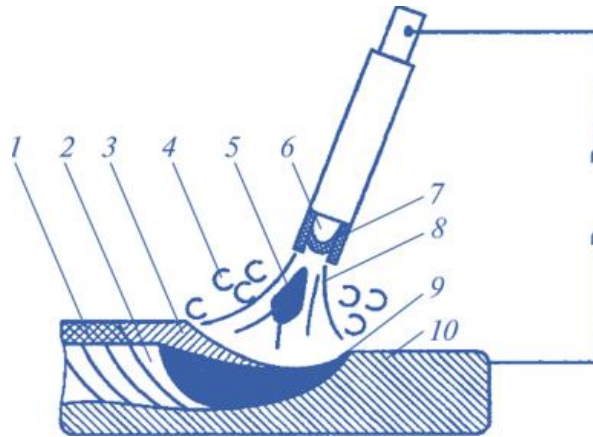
Scheme of the process of manual arc welding with a covered electrode:1- solid slag; 2-seam; 3-liquid slag; 4-gas protection;5-drops of liquid metal; 6-rod; 7- electrode coating; 8-arc; 9-welding bath; 10-detail
